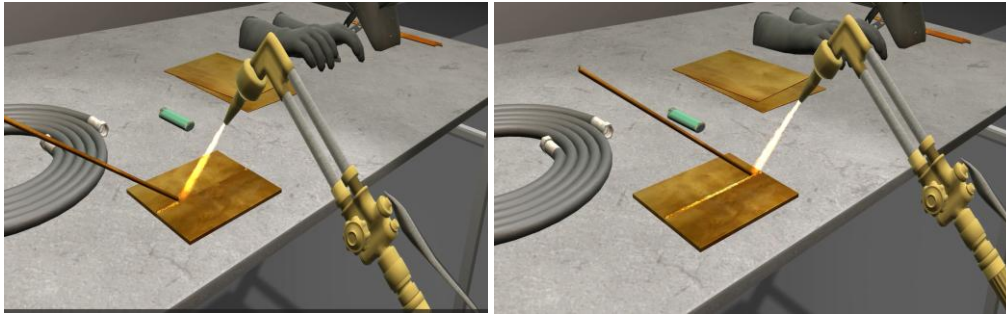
Illustration of the welding process of two pieces of workpiece together
